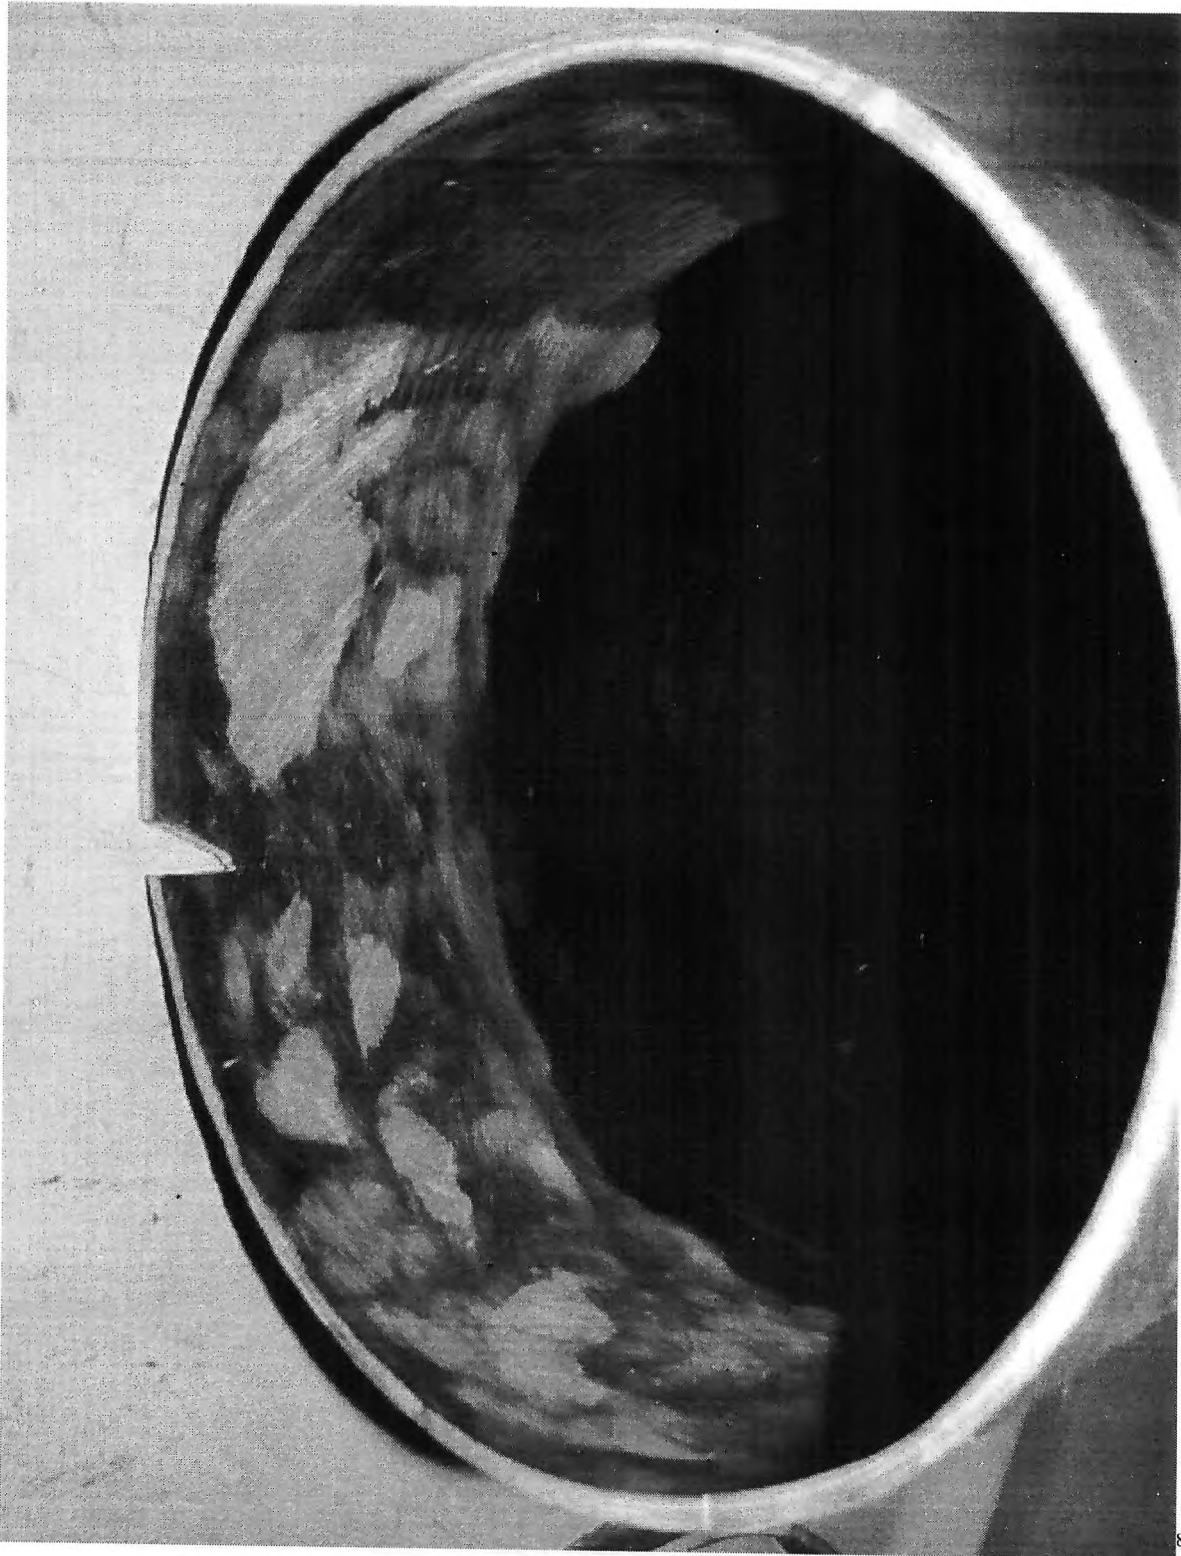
Pipe Section Labeled Sample 0191-05, Close-up View of Inner Surface
